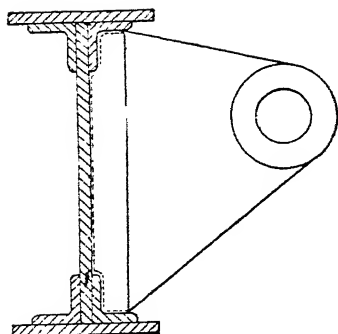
CASTING FITTED OVER ANGLES AS WELL AS PLATE
